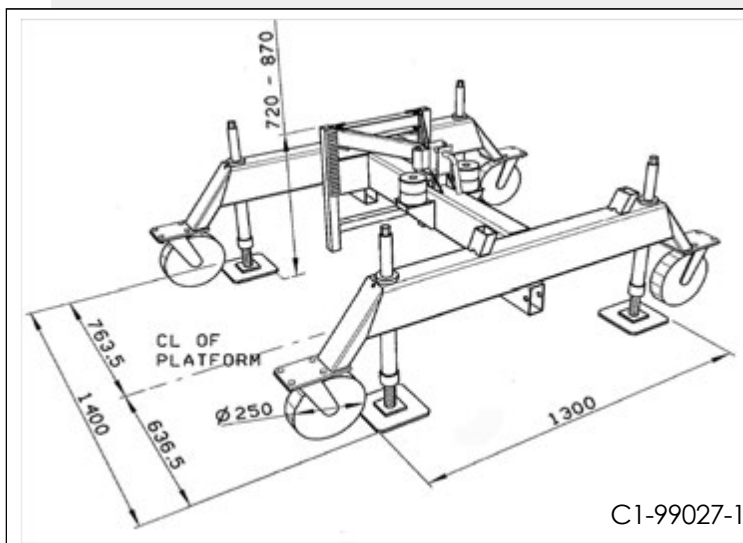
SC1000 single with dimensions. Outriggers are extended, but turned out on mast side only.
